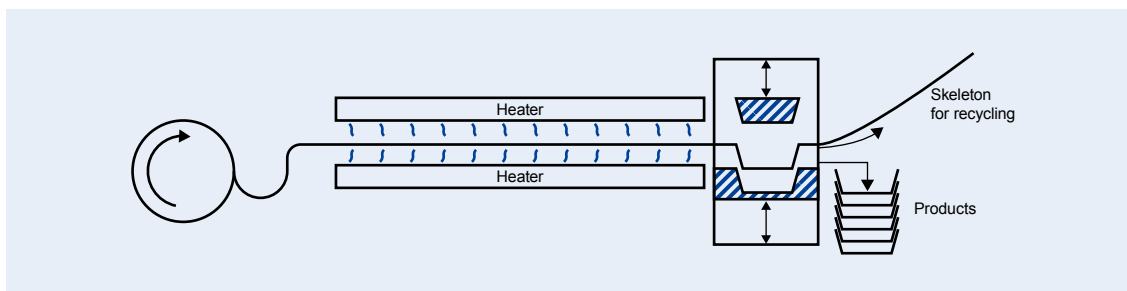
shows a typical thermoforming setup to obtain foamed products.
